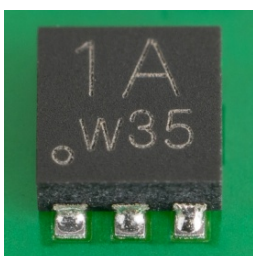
DFN2020MD-6 (SOT1220) with tin-plated wettable side pads (5-D191): Solder paste printing without fails
